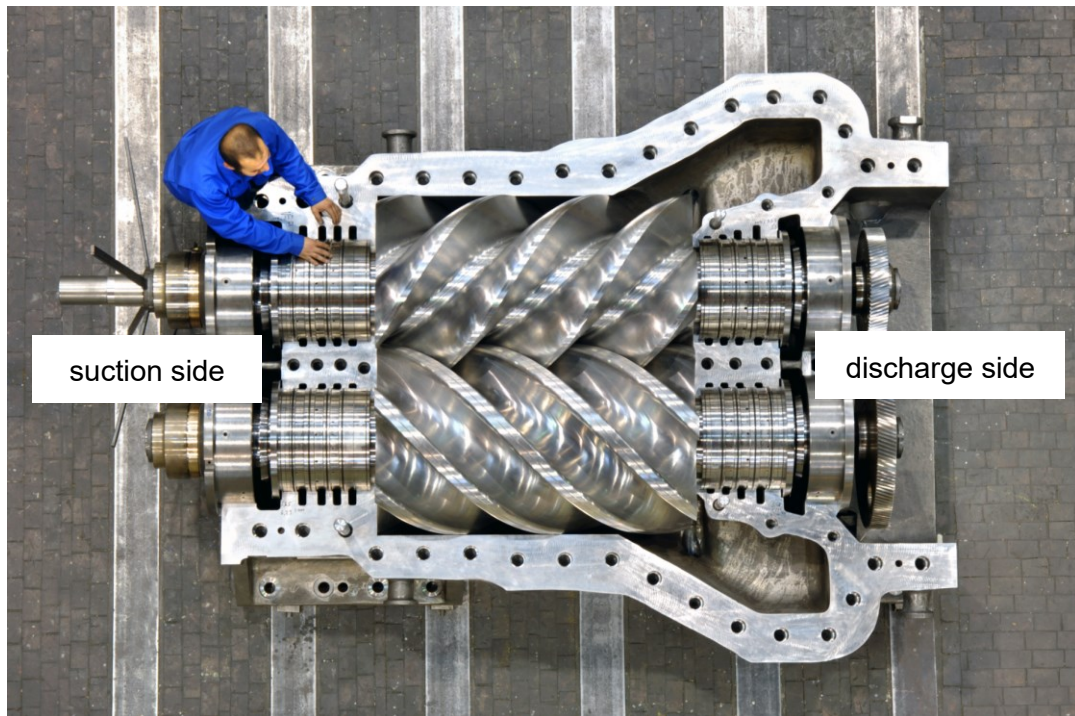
Top view of a large opened screw compressor for process gas¹⁷
